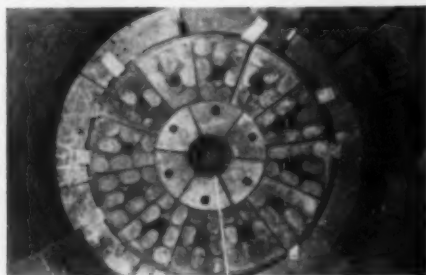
Feed and liner arrangement. The eight outside 9-in. segments are not bolted.
